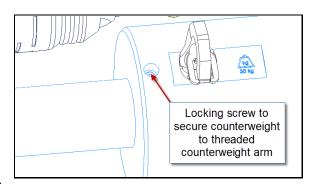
LOCATION OF LOCKING SCREWS
